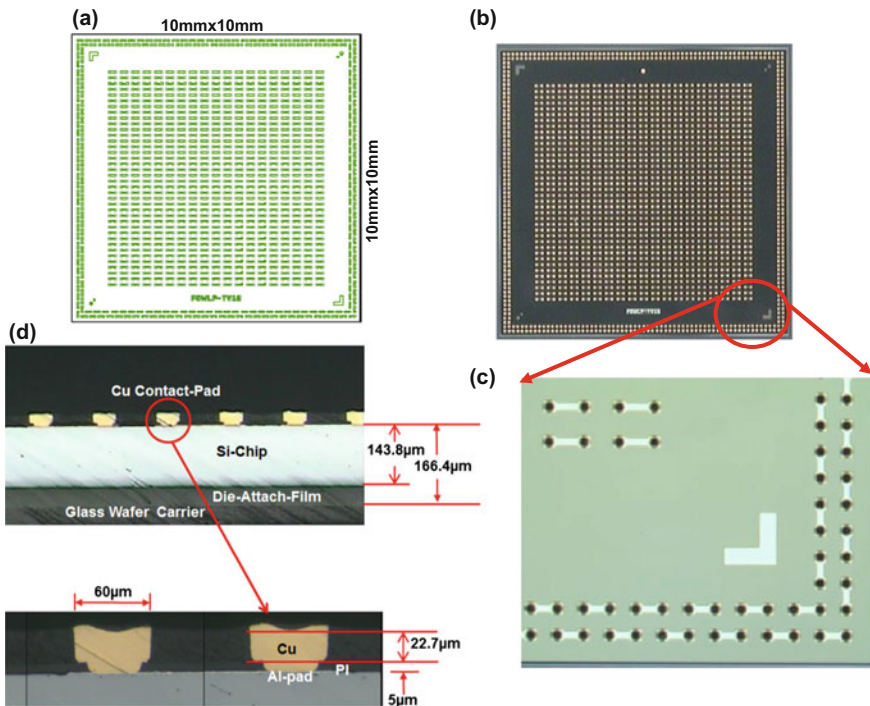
Test chip. a $10\text{ mm} \times 10\text{ mm}$ test chip layout. b The fabricated test chip. c A close-up look of the test chip. d Cross-section image of the test chip
